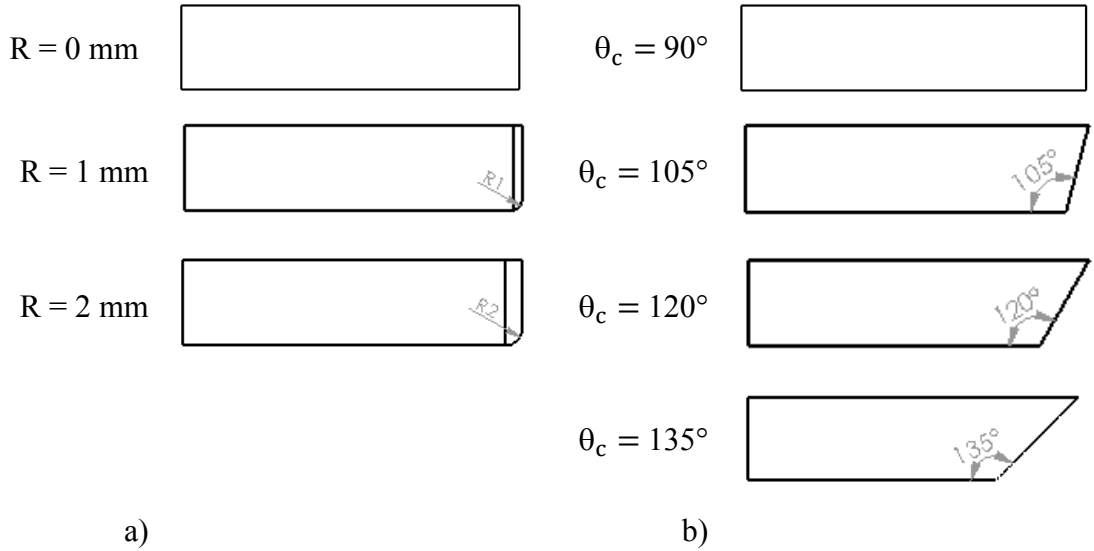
a) Samples with fillet radius $R = 0 \text{ mm}$, 1 mm and 2 mm , b) samples with contact angle $\theta_c = 90^\circ$, 105° , 120° and 135° .
